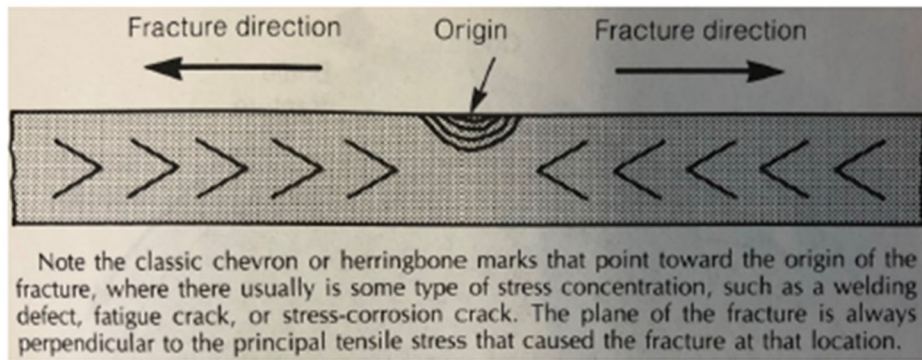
Illustration of chevron marks on a steel fracture surface.⁷⁵
